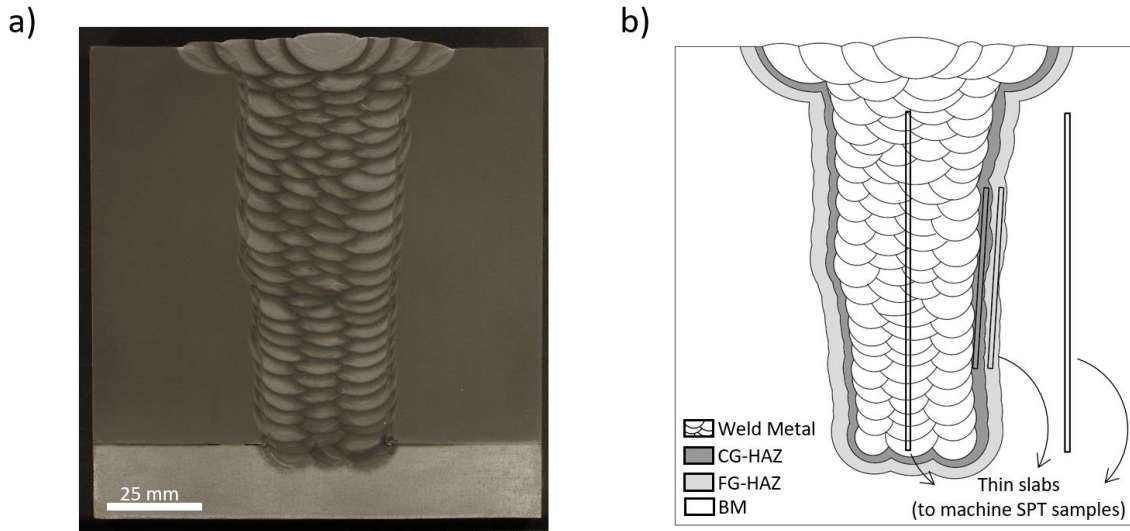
Welded joint. a) Macrograph of the welded joint; b) Schematic view of the weld with the different subzones and location of the thin slabs used for SPT characterization
